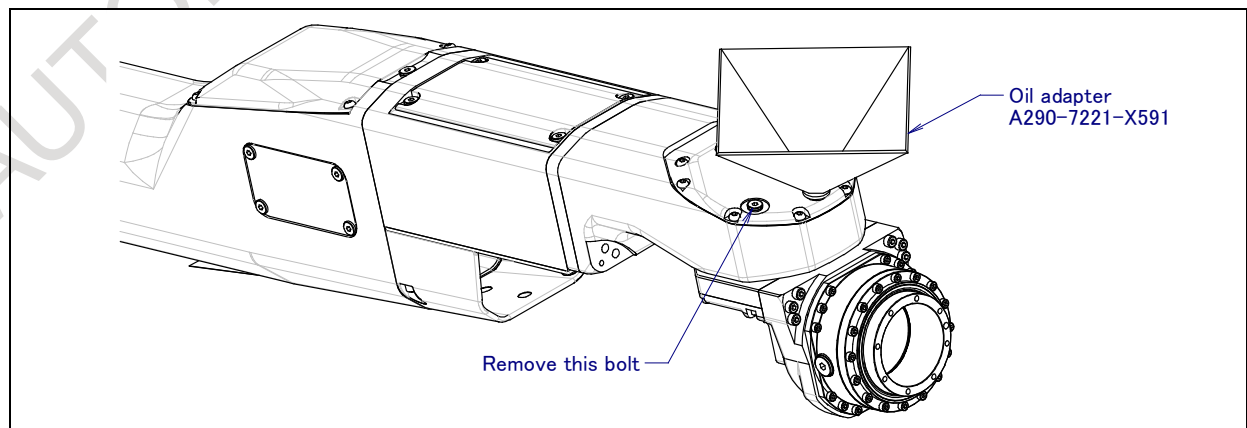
(e) Oil adapter (supplying oil J5/J6-axis gearbox)
